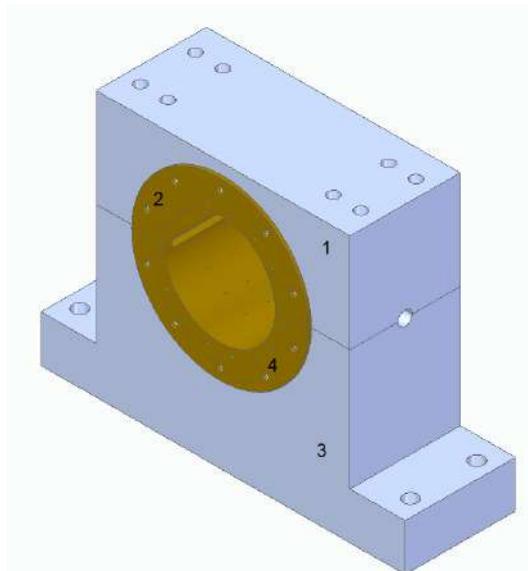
Complete bearing: upper cover (1), upper pad (2), base (3) and lower pad(4).
